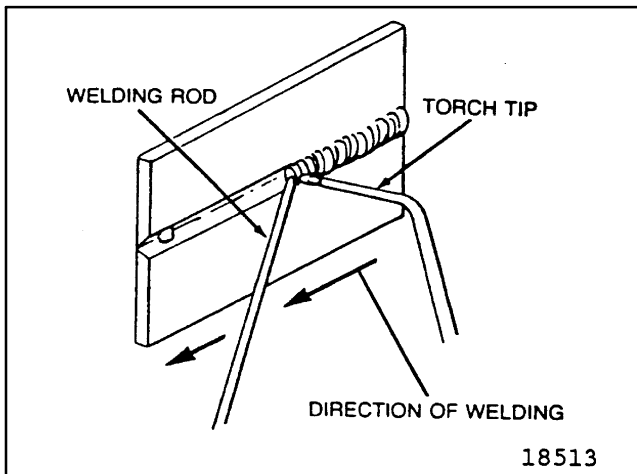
Welding a Butt Joint in the Horizontal Position
